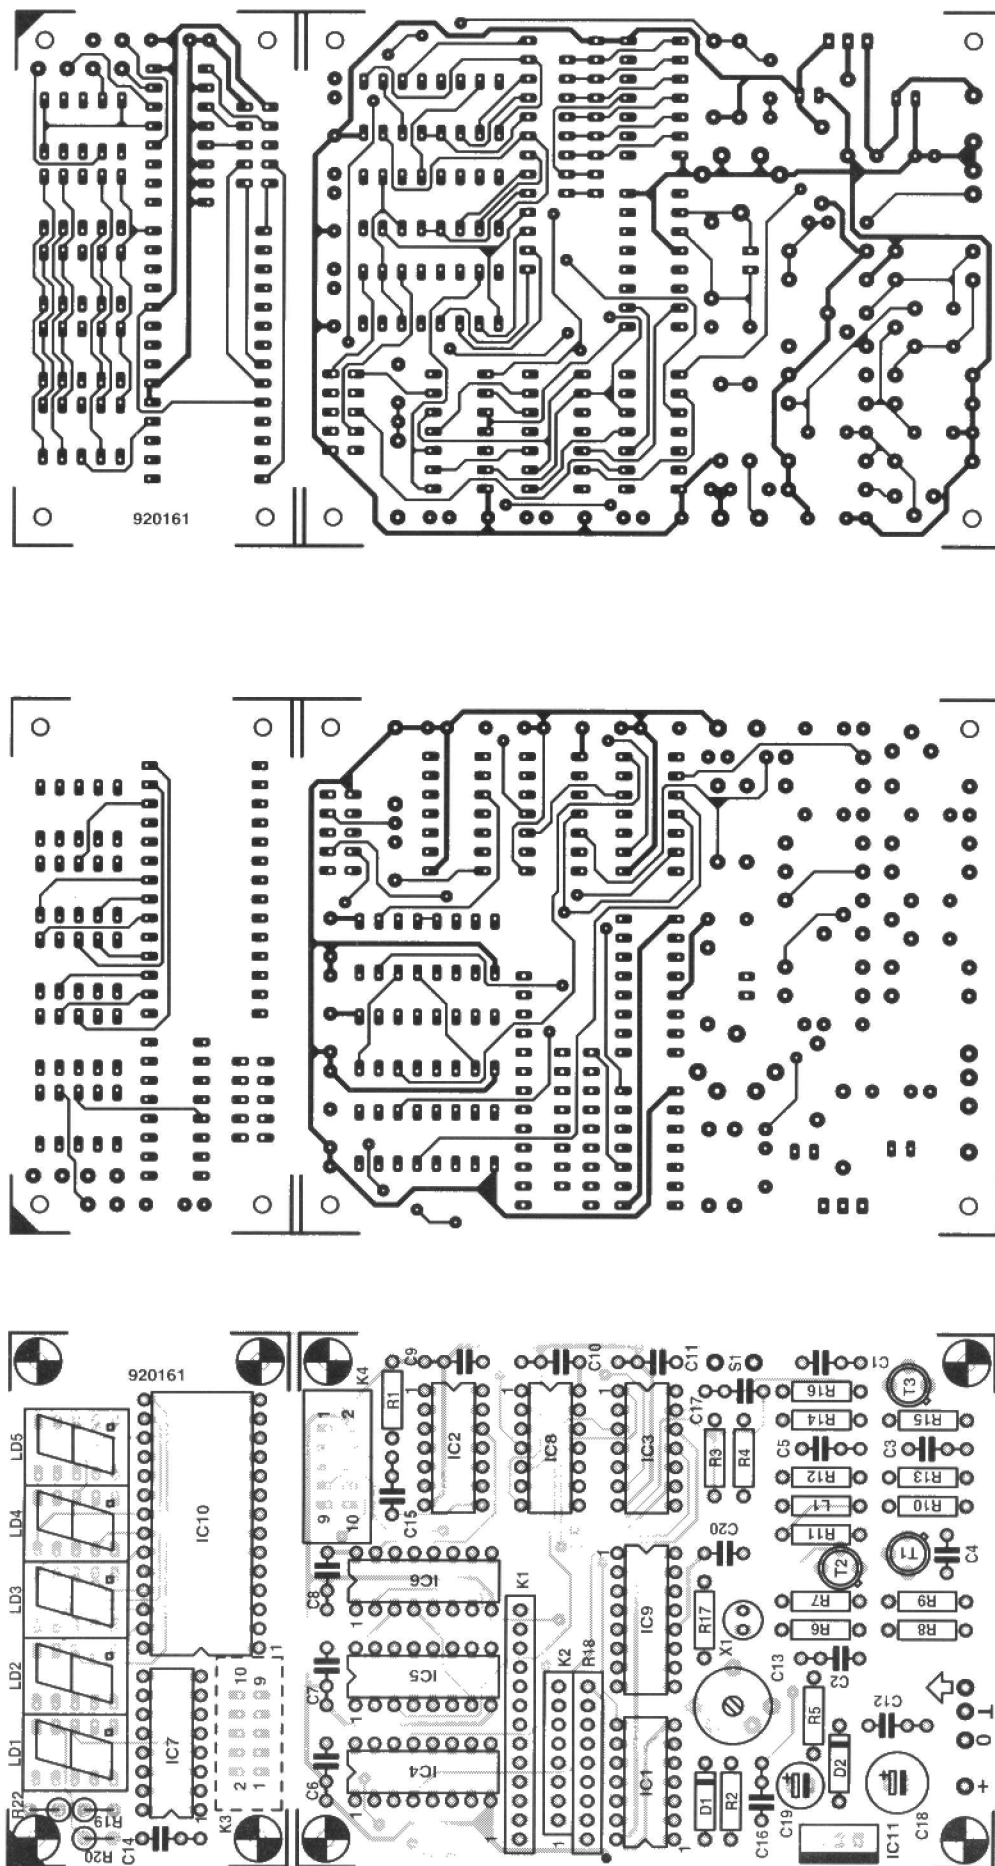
Copper track layouts (direct reading) and component mounting plan of the double-sided PCB designed for the digital dial.
